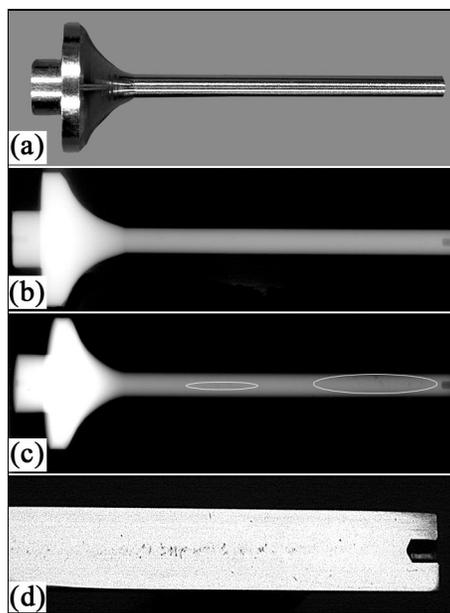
Centrifugally-cast TiAl exhaust valves: (a) in machined condition; (b) radiograph showing absence of defects; (c) and (d) radiograph and macro-section showing fine centreline porosity.
